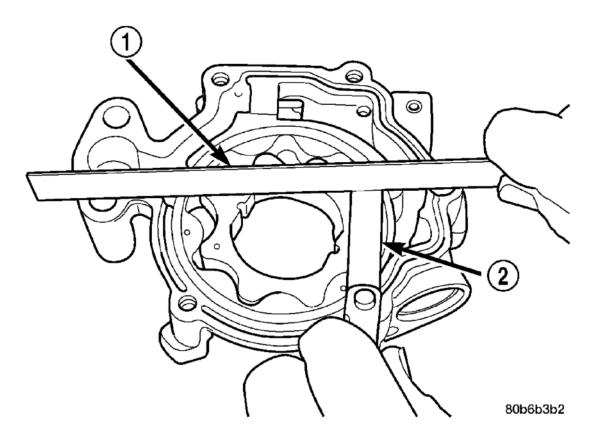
Measuring Clearance Over Rotors Courtesy of CHRYSLER LLC
